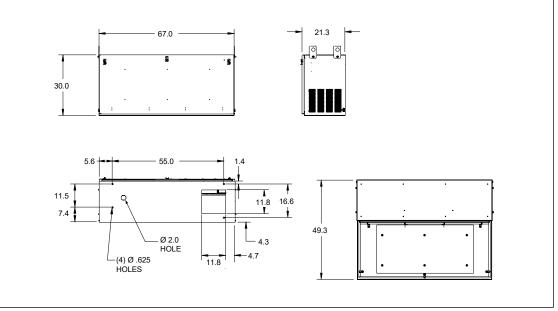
SC2NN12HN3/HN4/HN7 Dimensions (in inches)
